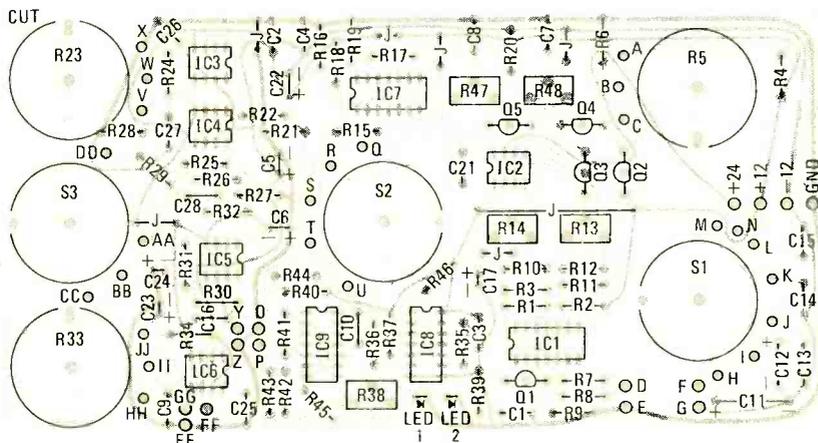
PLACEMENT OF PARTS on the main PC board. Control shafts fasten this board to the front of the enclosure.
